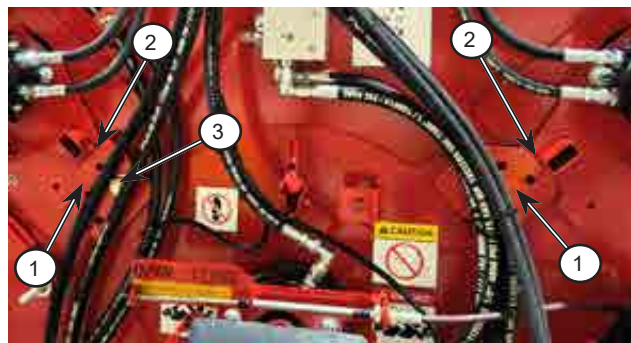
Feed Rollers Resting on the Adjustment Plates (Front Shown)
